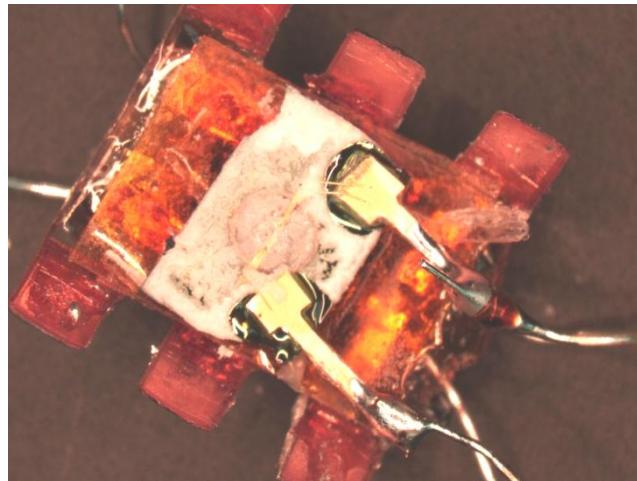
Solder joints made directly to FET and capacitor before assembling circuit on hexapod
